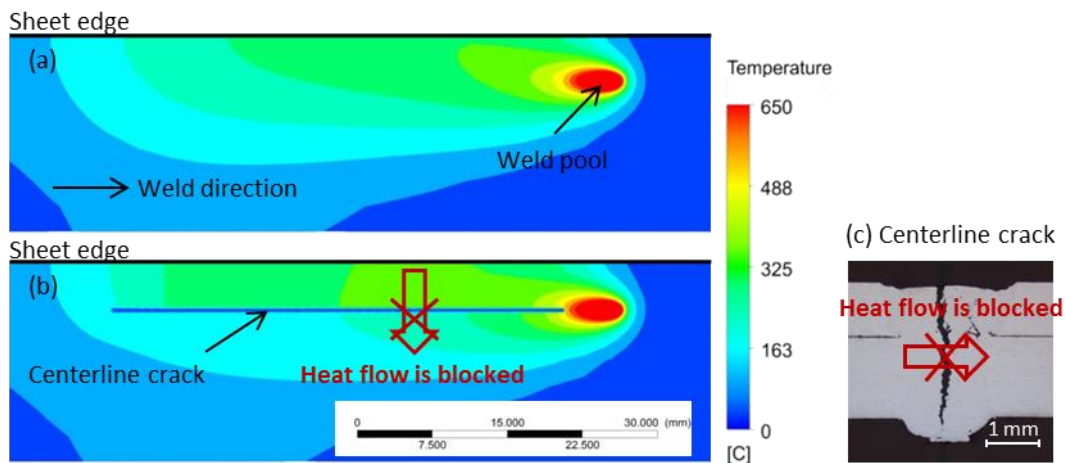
(a) Temperature field of a crack-free weld calculated with a finite numerical welding process modelling; (b) Calculated temperature field with a centerline crack; (c) Cross-section of an overlap weld from two 6000 series aluminum alloy sheets; Process parameter for (a), (b), (c): $P = 5 \text{ kW}$, $v = 6 \text{ m/min}$, $d_f = 650 \mu\text{m}$, edge distance $a = 5 \text{ mm}$, sheet thickness $s = 1.2 \text{ mm}$ (top) and $s = 1.7 \text{ mm}$ (bottom).
